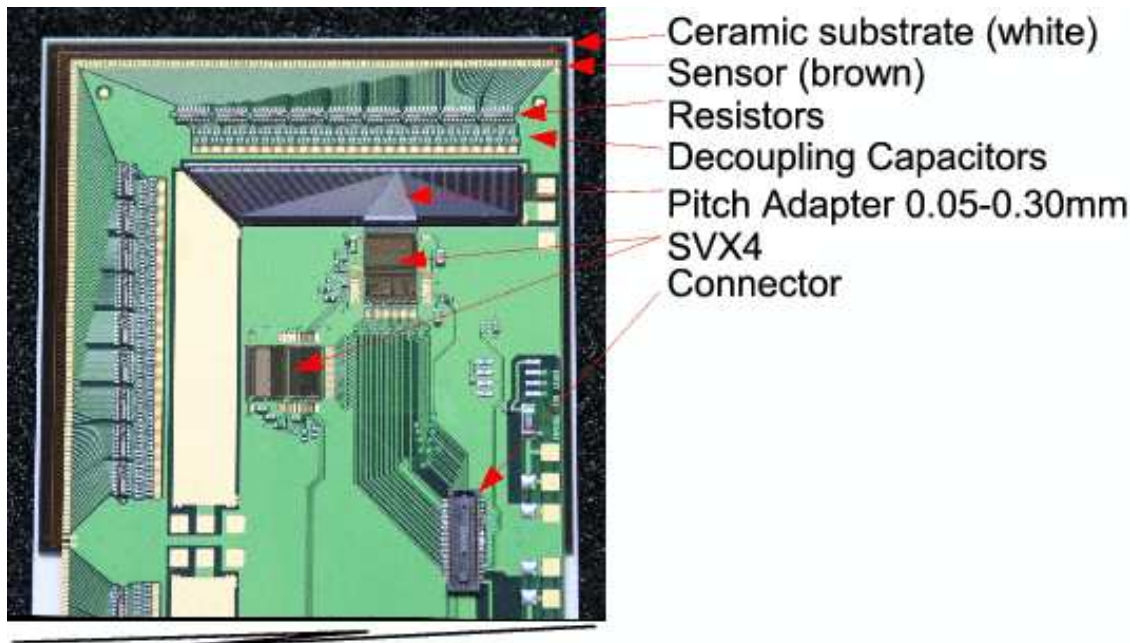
Sensor Readout Module, the upper half of the module shown. In the final version two connectors will be installed instead of one.
